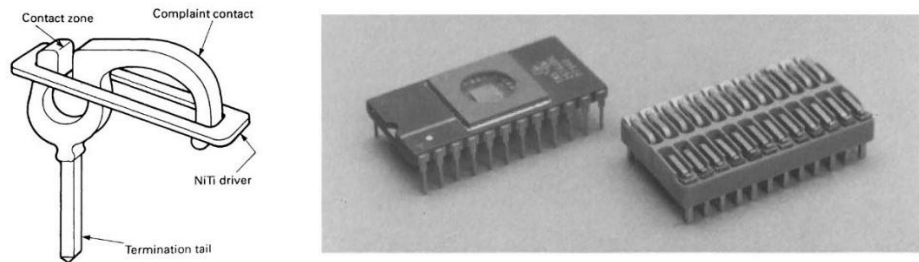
The Cryotact contact assembly (a) and the DIP connector assembly (b) (Duerig *et al.*, 1990)
